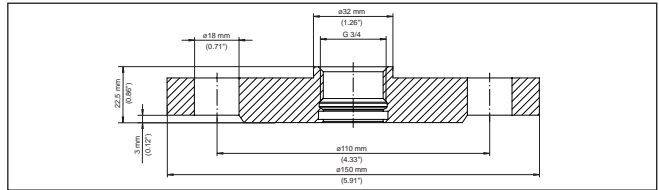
Dimensions of threaded adapter G $\frac{3}{4}$ (DIN 3852-X) on flange DN 40 (EN 1092-1, Form B1) PN 40
